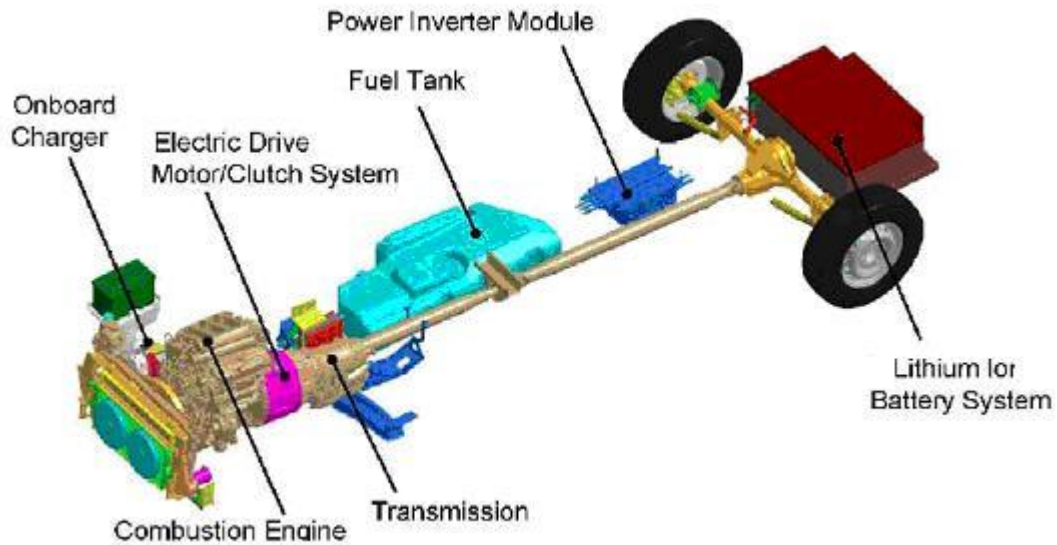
Parallel hybrid with pretransmission single-shaft torque. [8]
